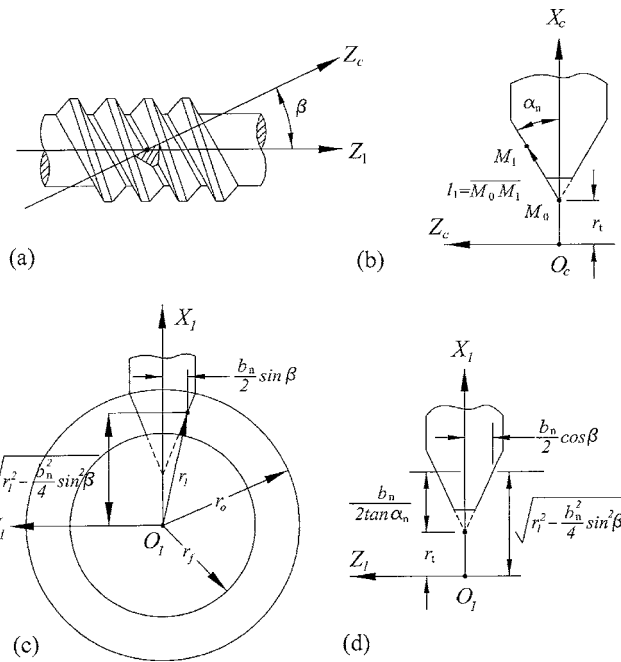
Geometry of the straight-edged cutting blade and worm-type hob cutter
